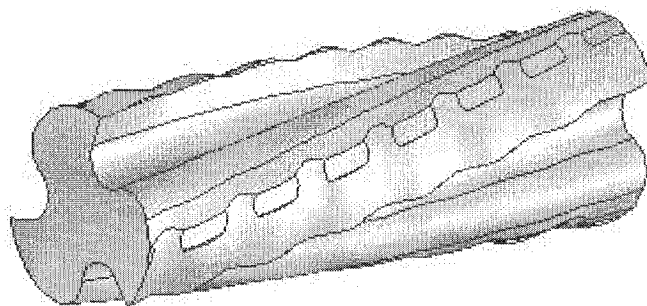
Illustration of 3D model of cutting edge machined by laser.
